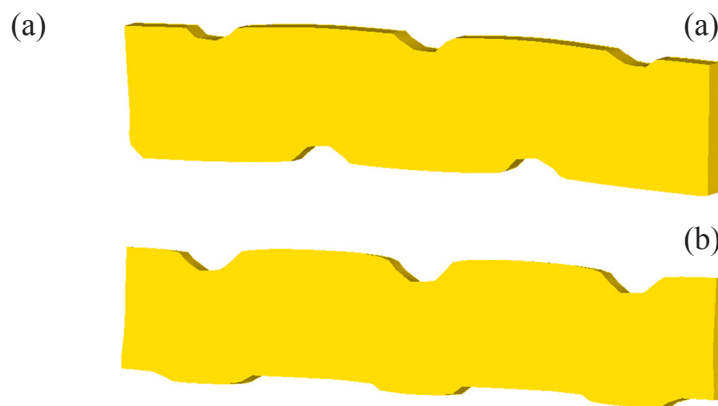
The profile of the workpiece after rolling in relief rolls: (a) the first scheme; (b) the second scheme.
